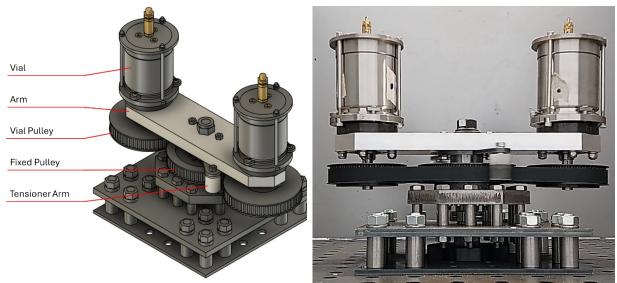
General construction of Pluto Mill Prototype using belt drive.
